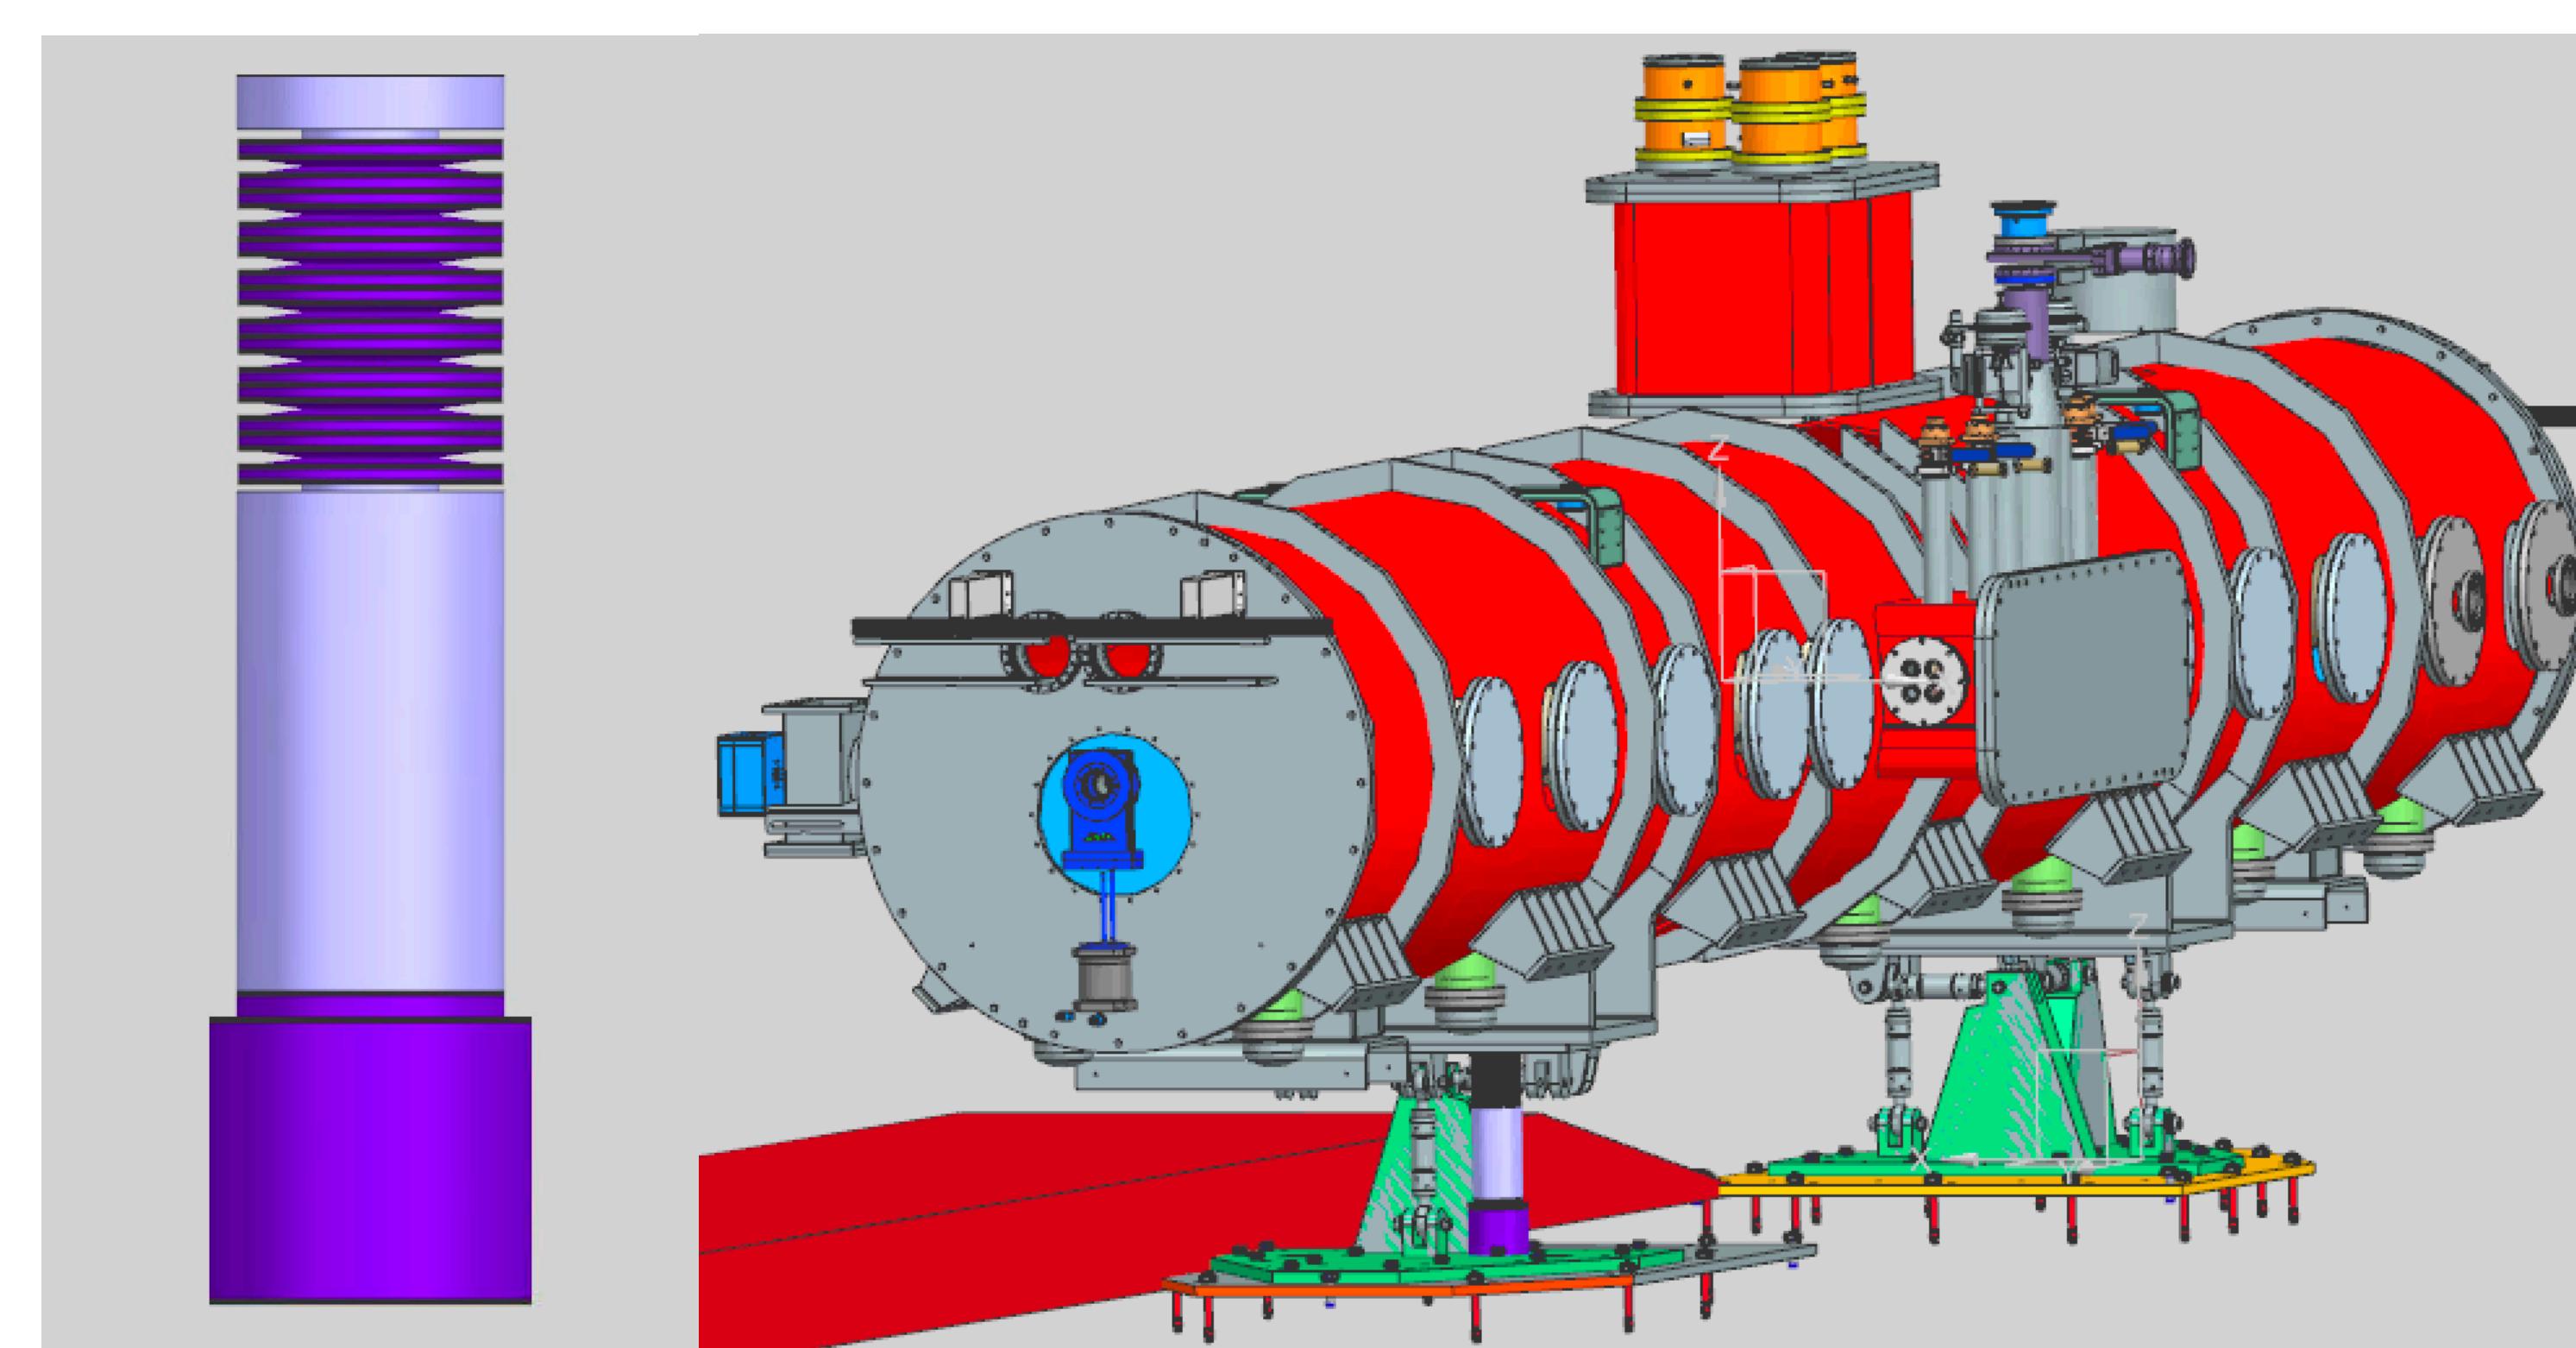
NX 3D CAD Models of the Hydraulic Cylinder & Disc Spring System
